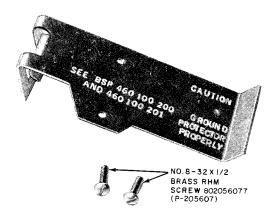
7A Clip For Mounting 123A1A (MD) or 123E1A Protector and 840362024 Capactor Board Assembly in Panel Set
